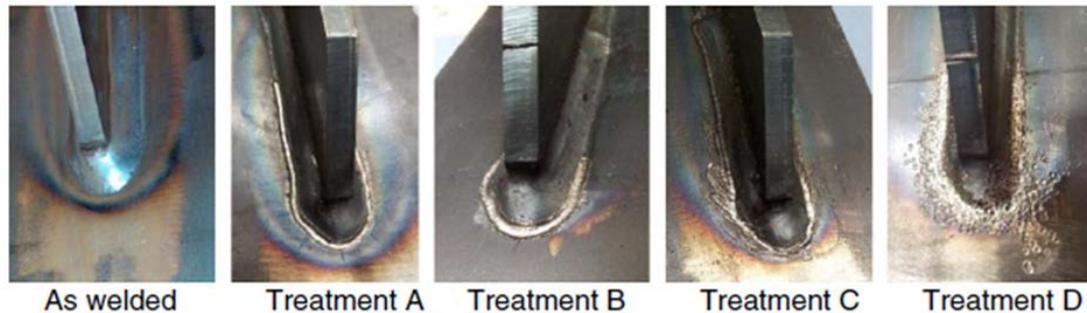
Examples of test specimens as-welded and following HFMI treated by four equipment manufacturers [19].
